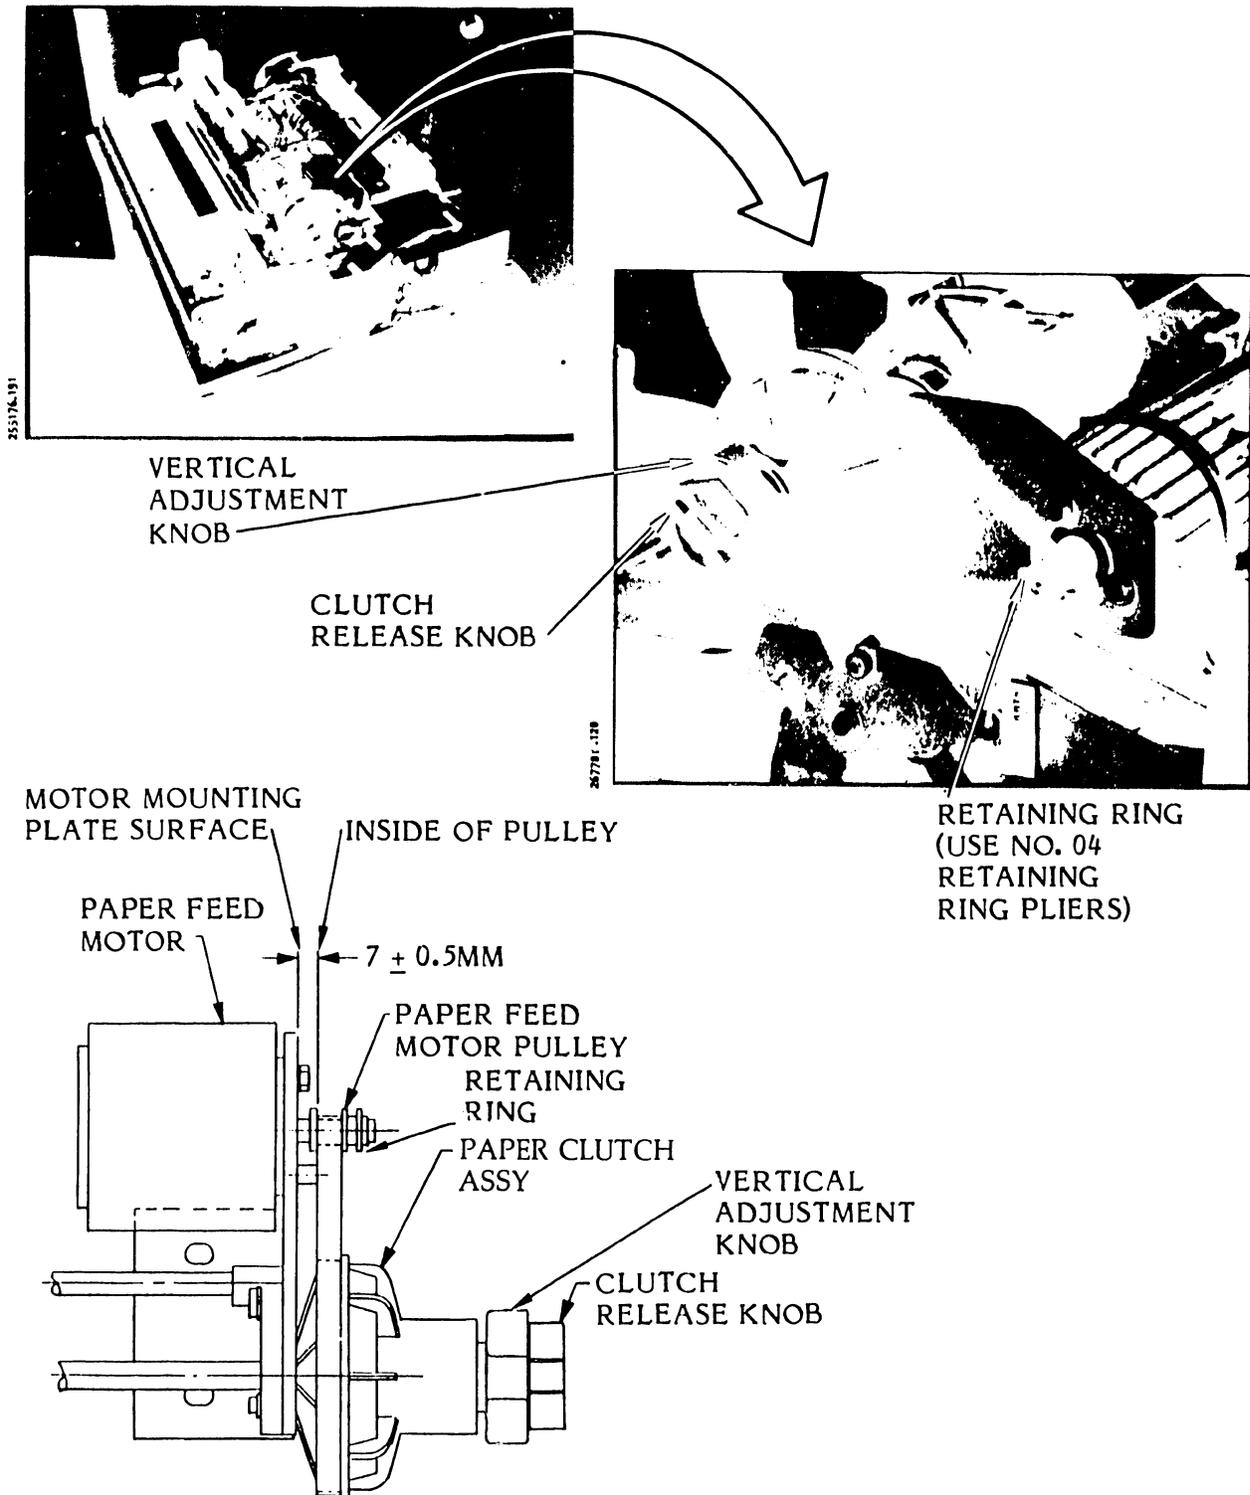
Paper Feed Motor Timing Belt Tension Adjustment
